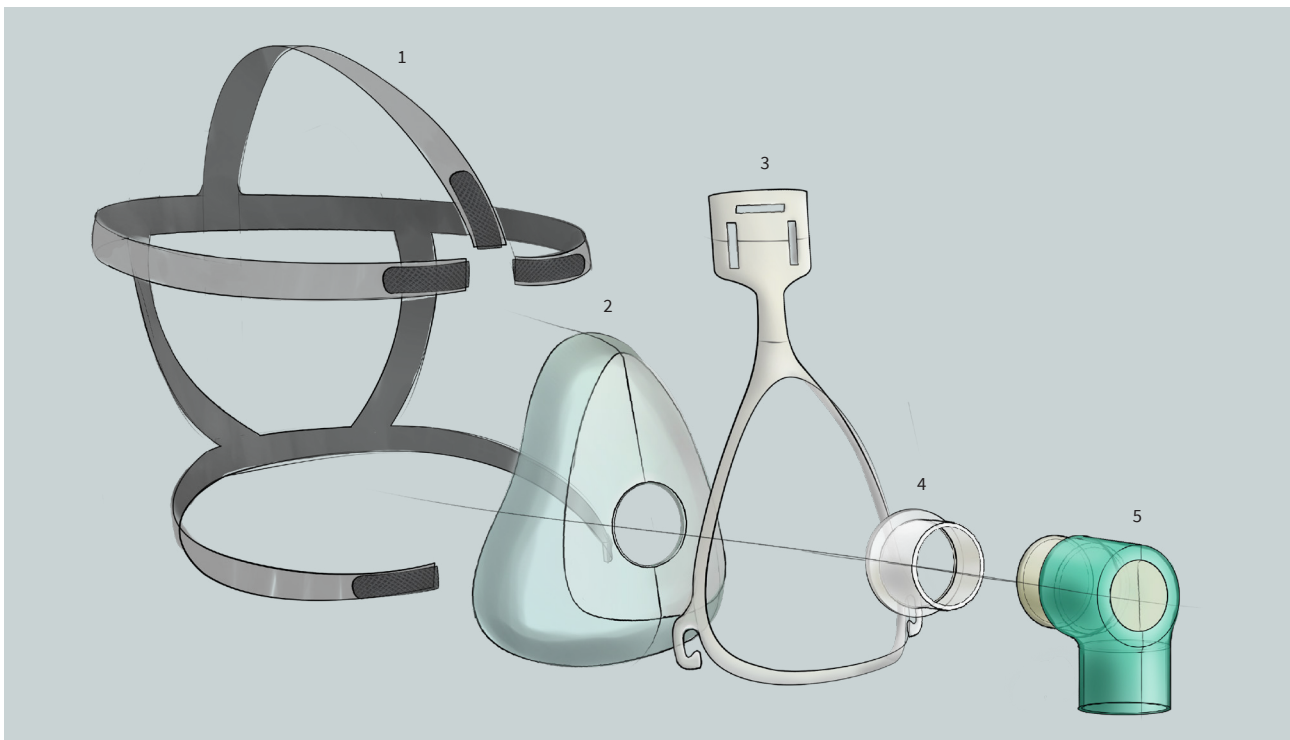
Parts of the Flexible Mask, (1) headgear, (2) cushion, (3) holder, (4) inlet, and (5) swivel.
